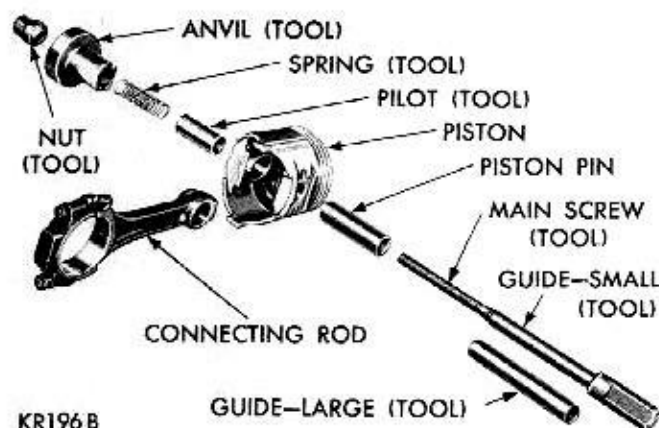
Tool Arrangement for Installing Piston Pin and pilot in the anvil. Install piston pin over main screw.
